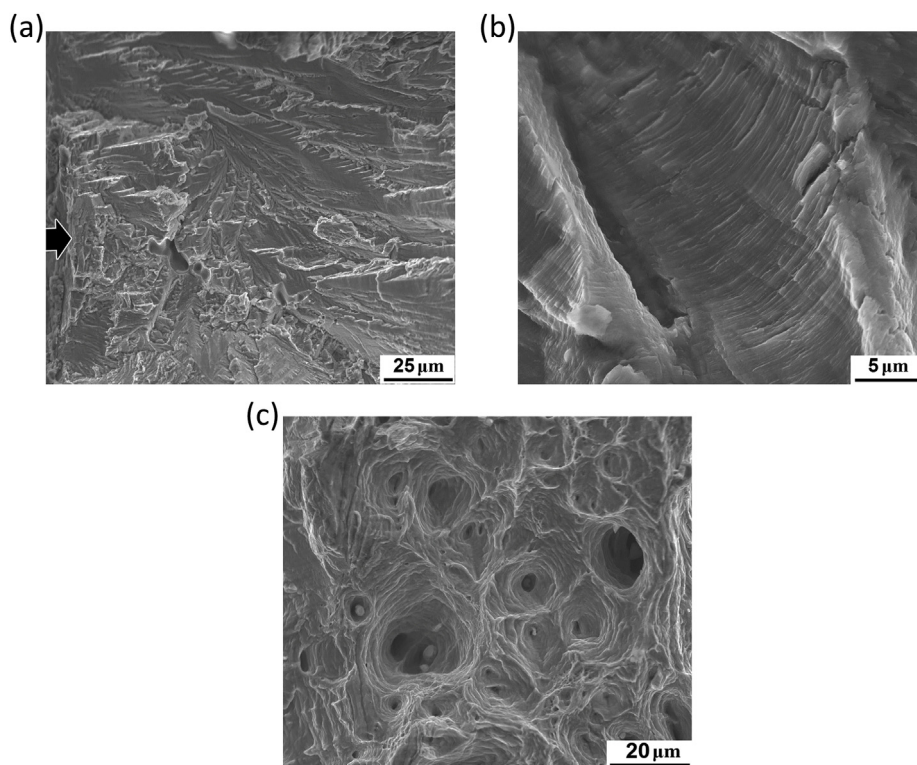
Fracture surfaces after fatigue test ($\sigma_{\text{max}} = 300$ MPa, $N = 83114$ cycles) of the program alloy in the laser beam welded condition: (a) – crack initiation region; (b) – crack propagation region; (c) - overload fracture.
